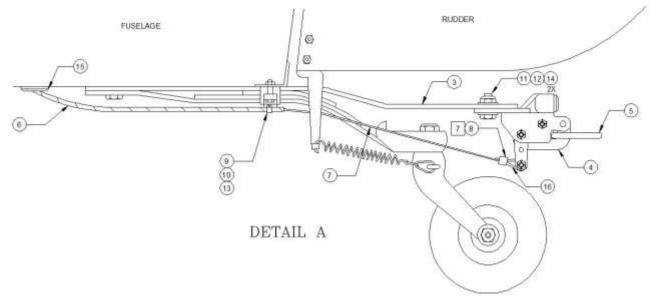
PATH Tow Hook Installation for Aeronca, Detail A
